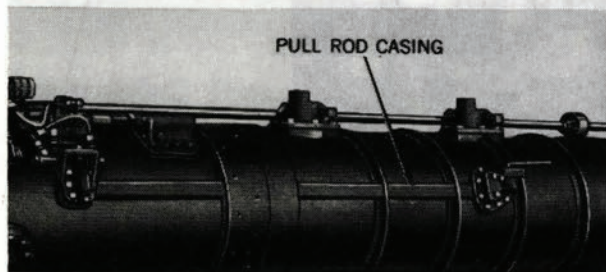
Pull Rod Casing—View of Tube From Outboard.
